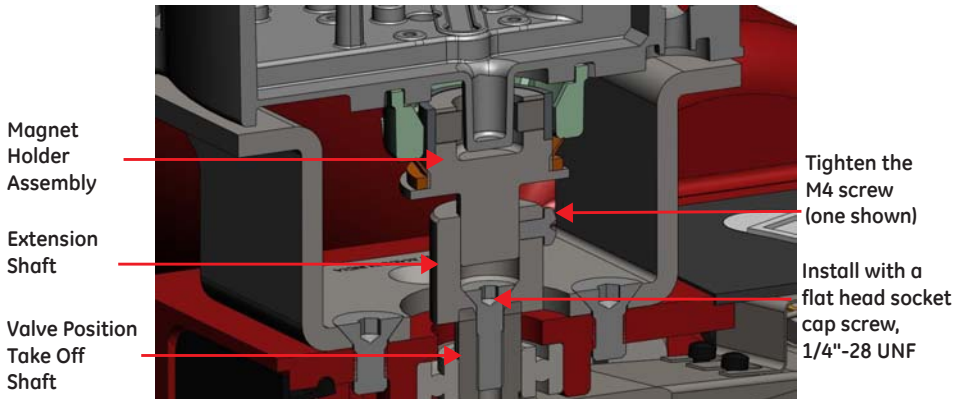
Extension Shaft to the Valve Position Take-off Shaft
